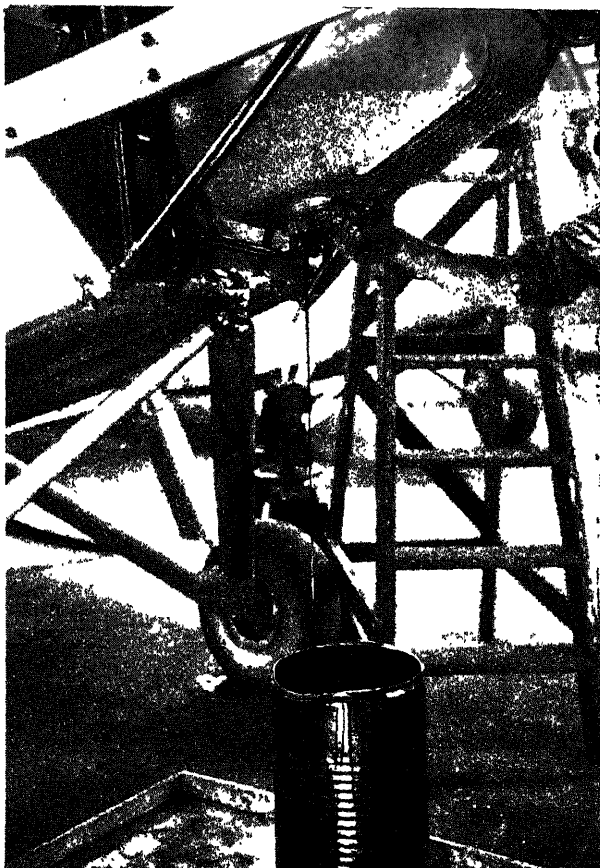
25-HOUR ROUTINE INSPECTION (7)
